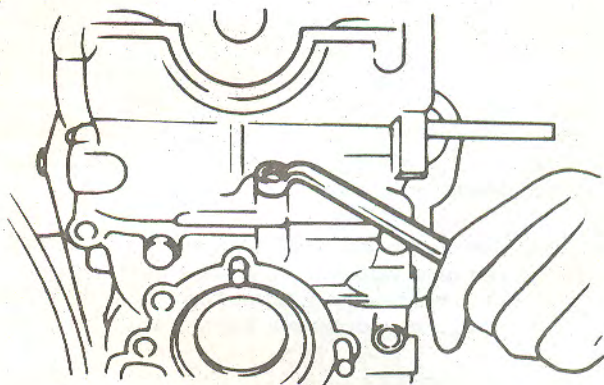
When removing the cylinder head, note that a bolt is situated on the outside between cylinder head and timing cover.
